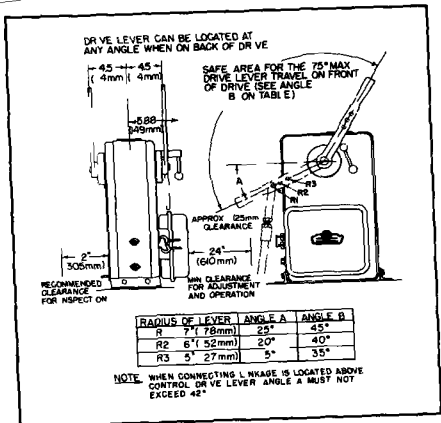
Clearance for TYPE AC0-404 Control Drive 75 ft lb (10³ Nm) torque
